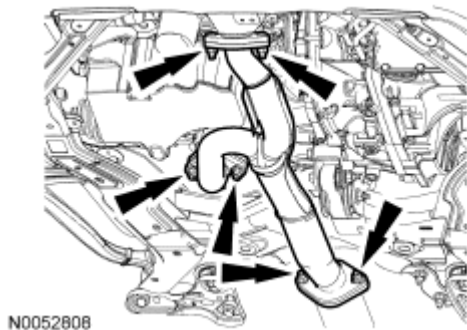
Locating Y-Pipe Nuts & Y-Pipe Assembly
